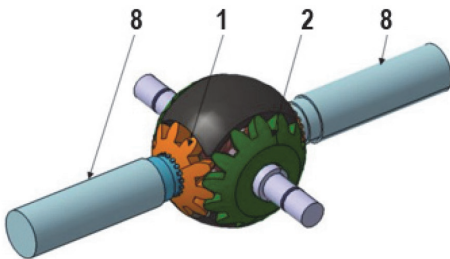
3D CAD model of the planetary and satellite gear assembly, 1 – planetary gear, 2 – satellite gear assembly, 8 – axle shaft
